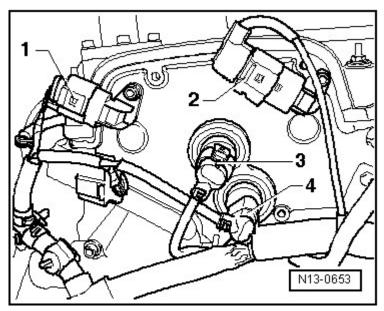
Identifying CMP Sensor G40, CMP Sensor 2 G163 And Connectors Courtesy of AUDI OF AMERICA, LLC
